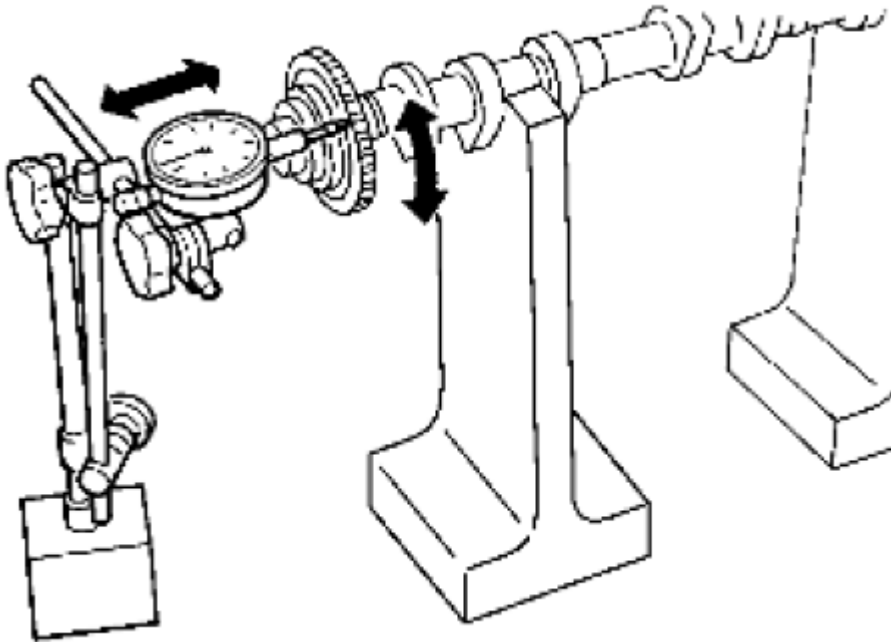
Measuring Camshaft Sprocket Runout With Dial Indicator
